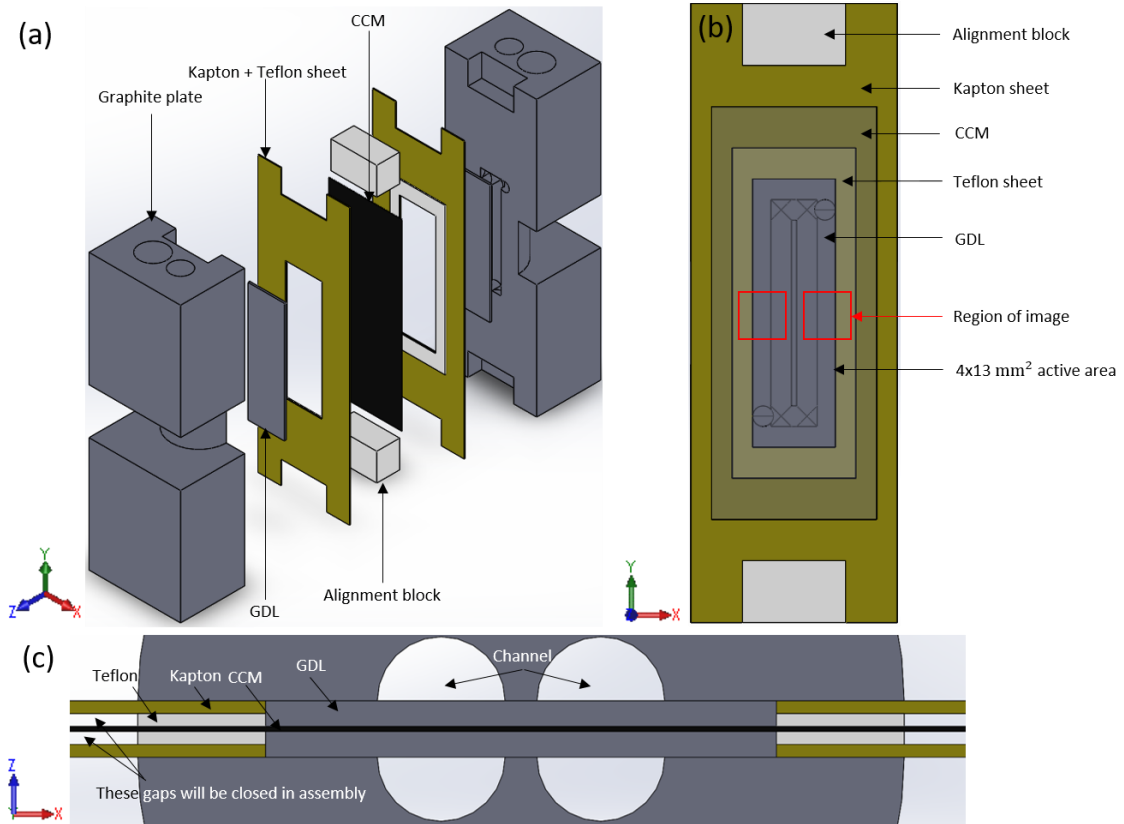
MEA edge design 2: (a) 3D exploded view; (b) planar view; and (c) cross-sectional view.
